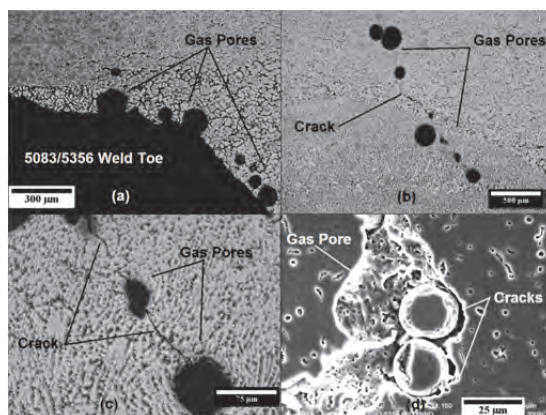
Defects typically observed in 5083/ER5356 SA-GMAW weld: (a) gas pores, (b)-(d) gas pores and cracks.
